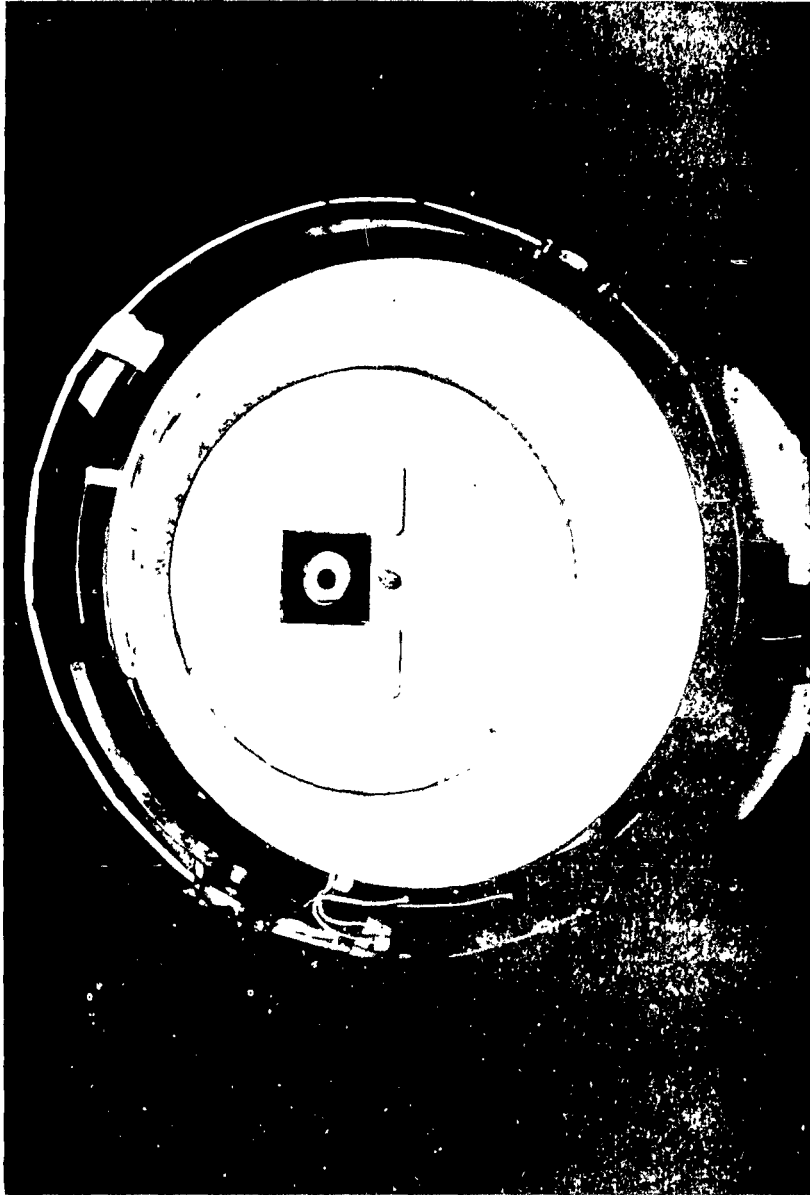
Nozzle Closure Assy - M51 Rocket Motor.
